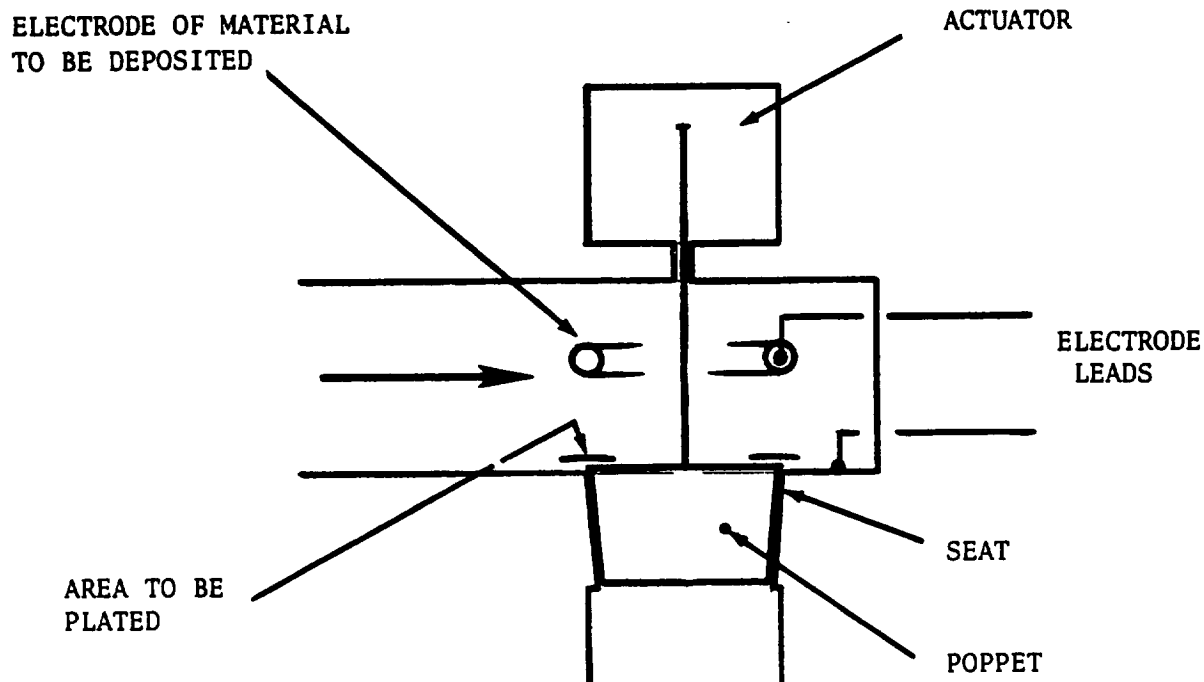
Schematic: Electroseat Moving Parts Type Valve Concept
